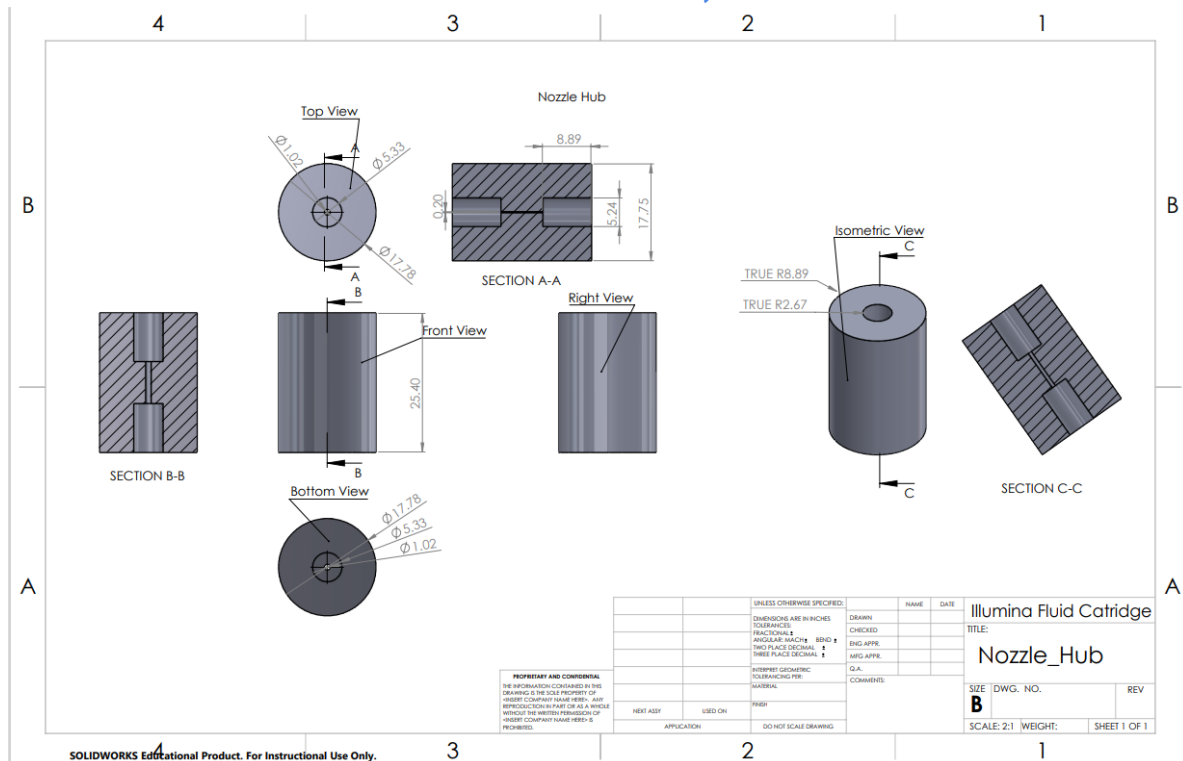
Technical Drawing of Nozzle Hub with Multiviews. For detailed drawing refer to Appendix C
